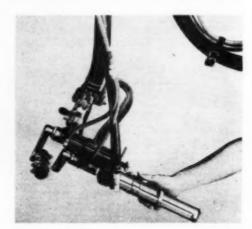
WELDING GUN designed for spot welding of light-gage alloy steels where low pressure is required in order not to deform work.
